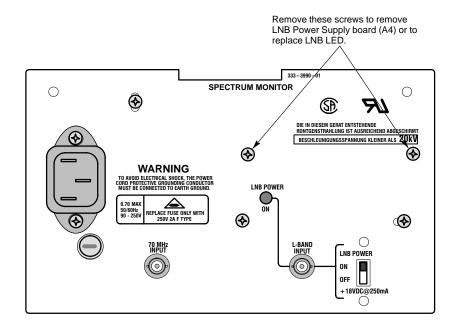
Mounting screws for the LNB Power Supply circuit board, A4
